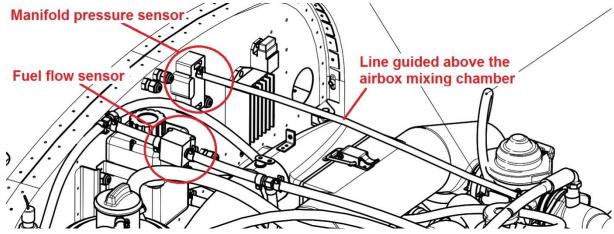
Type design definition of correct manifold pressure sensor and fuel flow sensor
